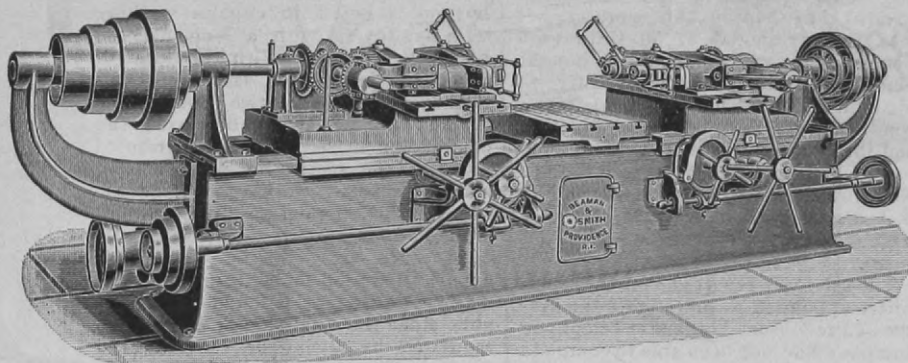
Adjustable Four-Spindle Drilling and Boring Machine.
